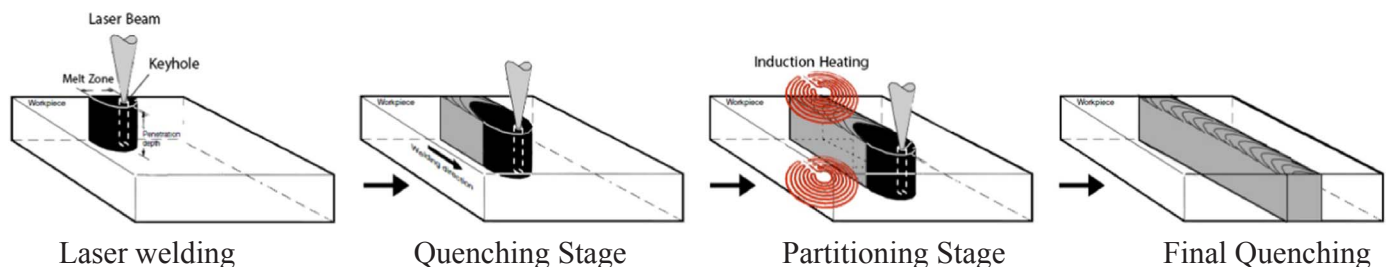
Schematic of the keyhole fiber laser welding process with Q & P post weld heat treatment.
